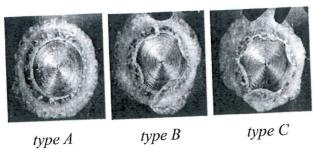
Front view of the joints. Photos are taken through the PMMA sheet after joining
